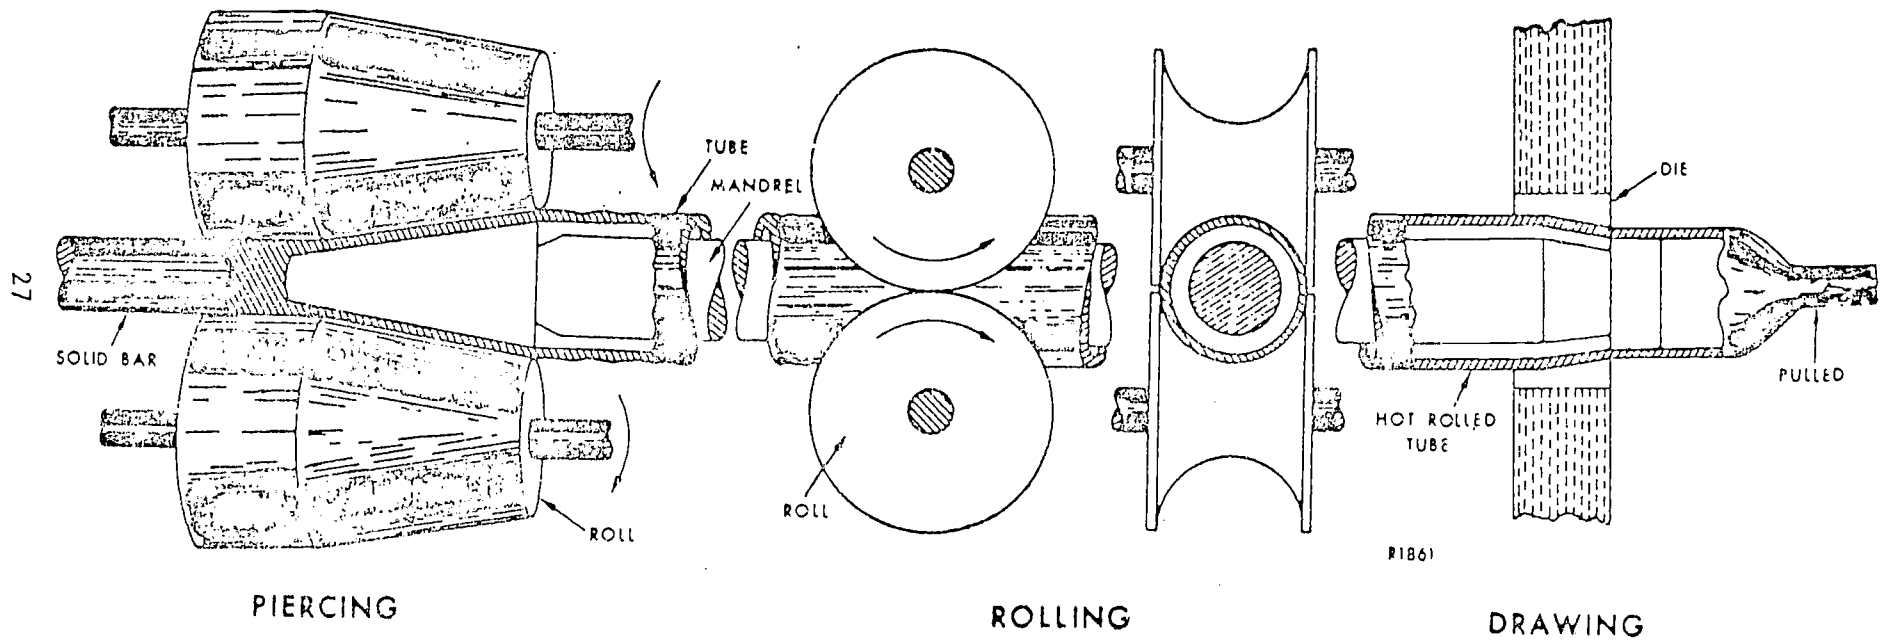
Making Seamless Tubing by Piercing, Rolling and Drawing.
